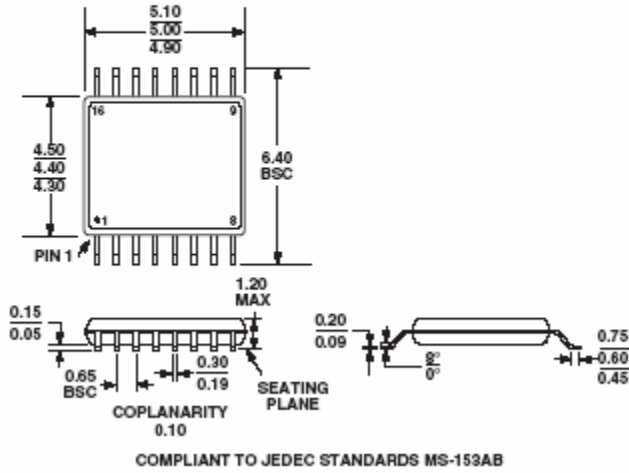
16-Lead Thin Shrink Small Outline Package [TSSOP] (RU-16)
